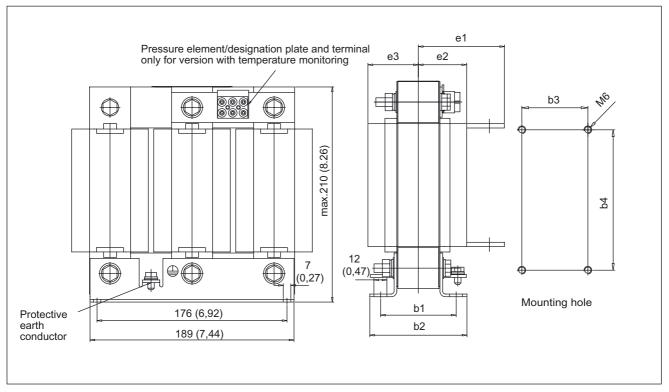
Dimension drawing: Motor reactor, frame size FSD
